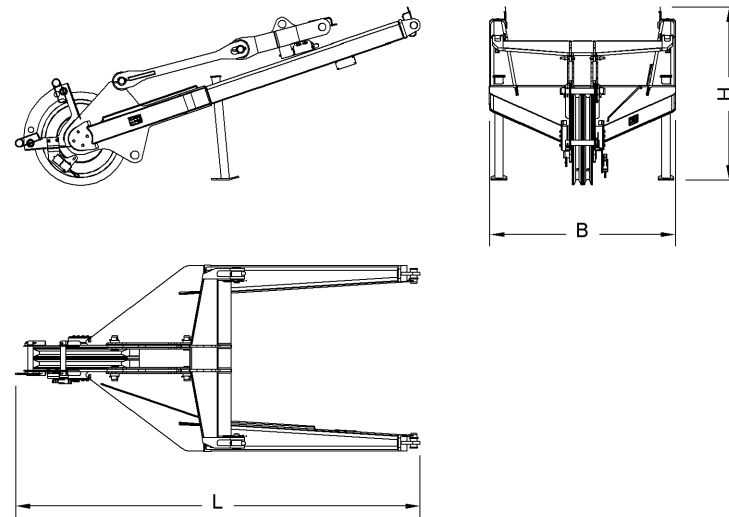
Dimensions of auxiliary jib (36 t (79.300 lb)) for the boom head section
